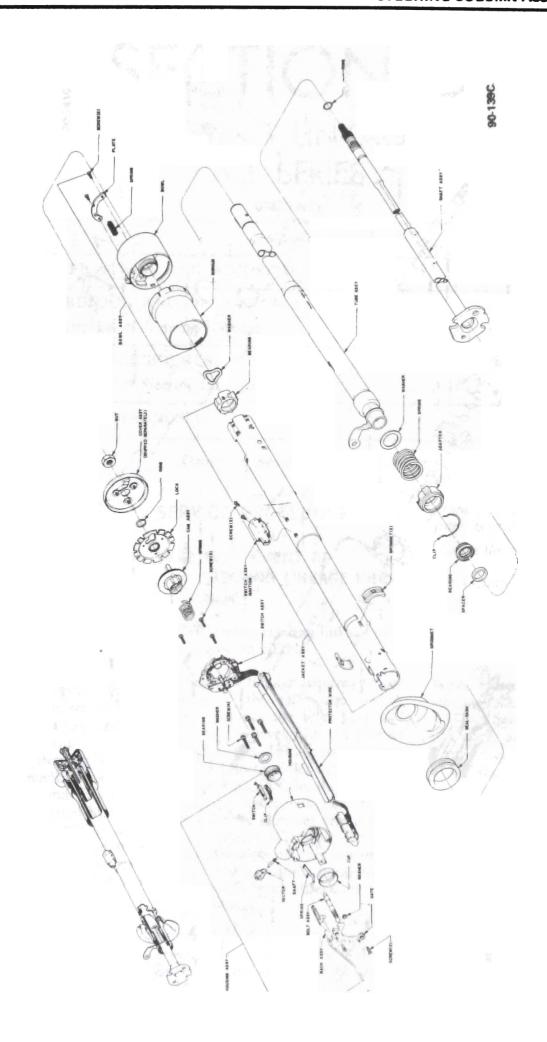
45-46-48-49000 Series Standard Steering Column
